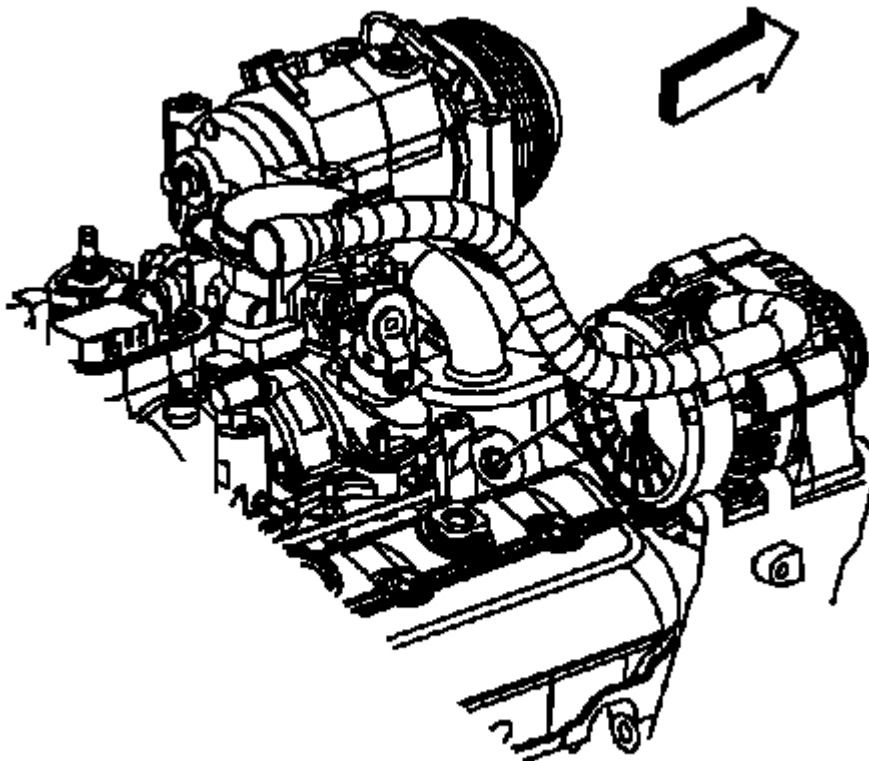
Identifying Heater Inlet Hose & Water Pump
